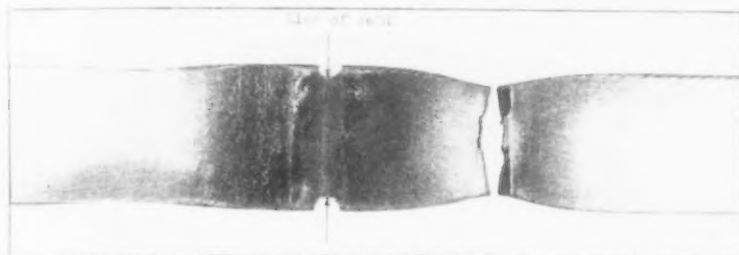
Tensile test with $\frac{1}{4}$ -in. diameter notch at the weld.
